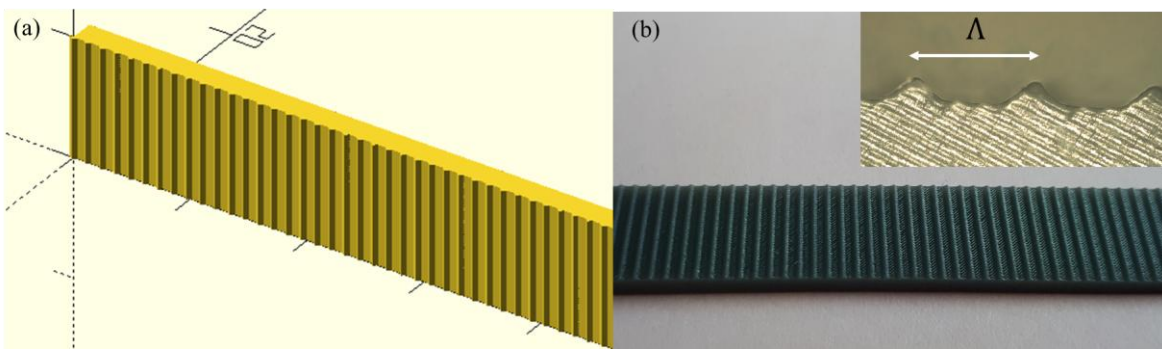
3D printed LPFG device: (a) CAD design using an OpenSCAD software and (b) fabricated sample images (inset: microscope image).
